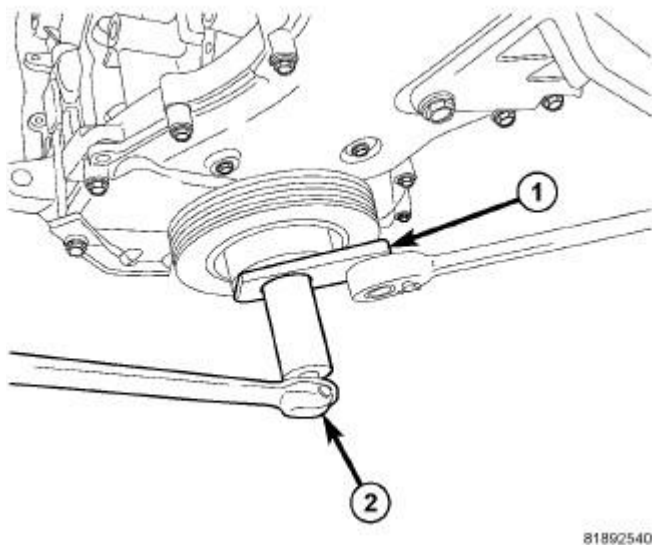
Removing/Installing Crankshaft Damper Bolt
